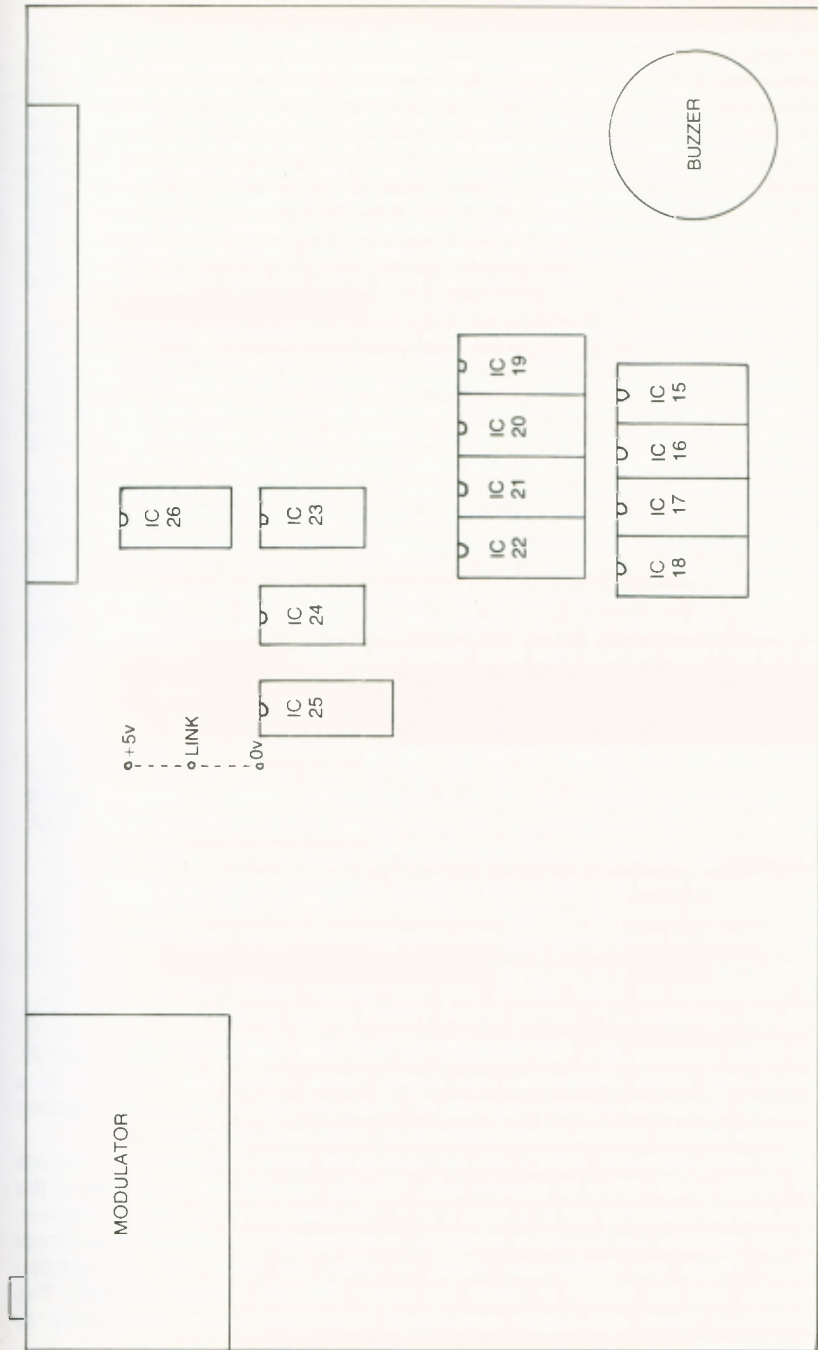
ISSUE 2 BOARD SHOWING POSITION OF MEMORY EXPANSION SOCKETS
